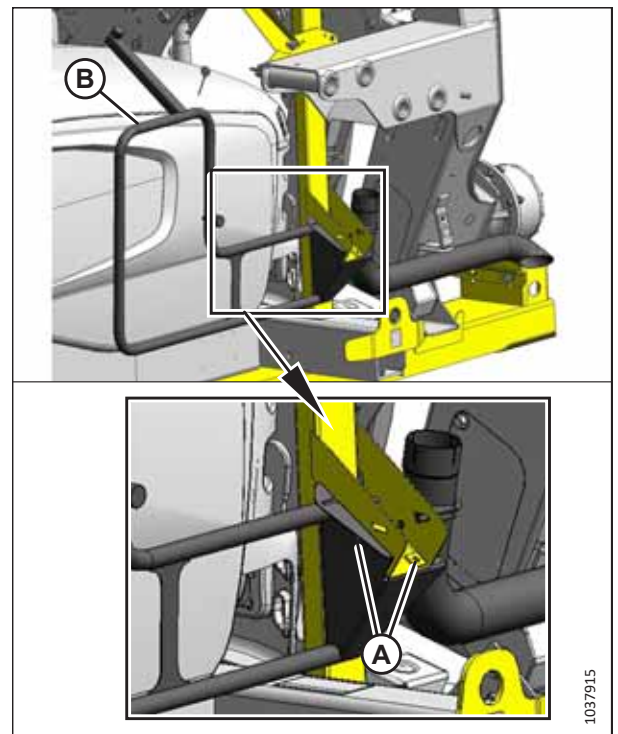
Hand Rails and Exhaust Stack Shipping Position
